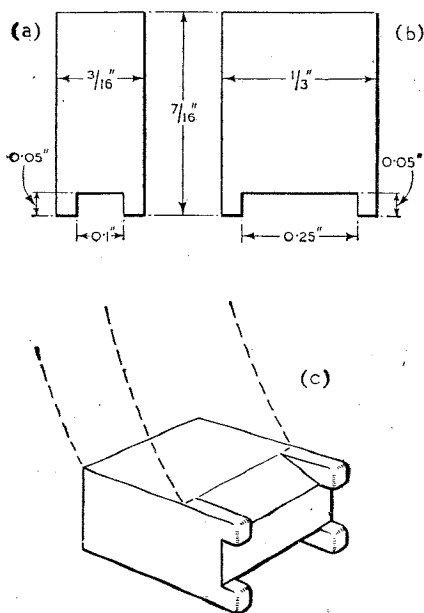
Dimensions and perspective sketch of one of the pole-pieces.
